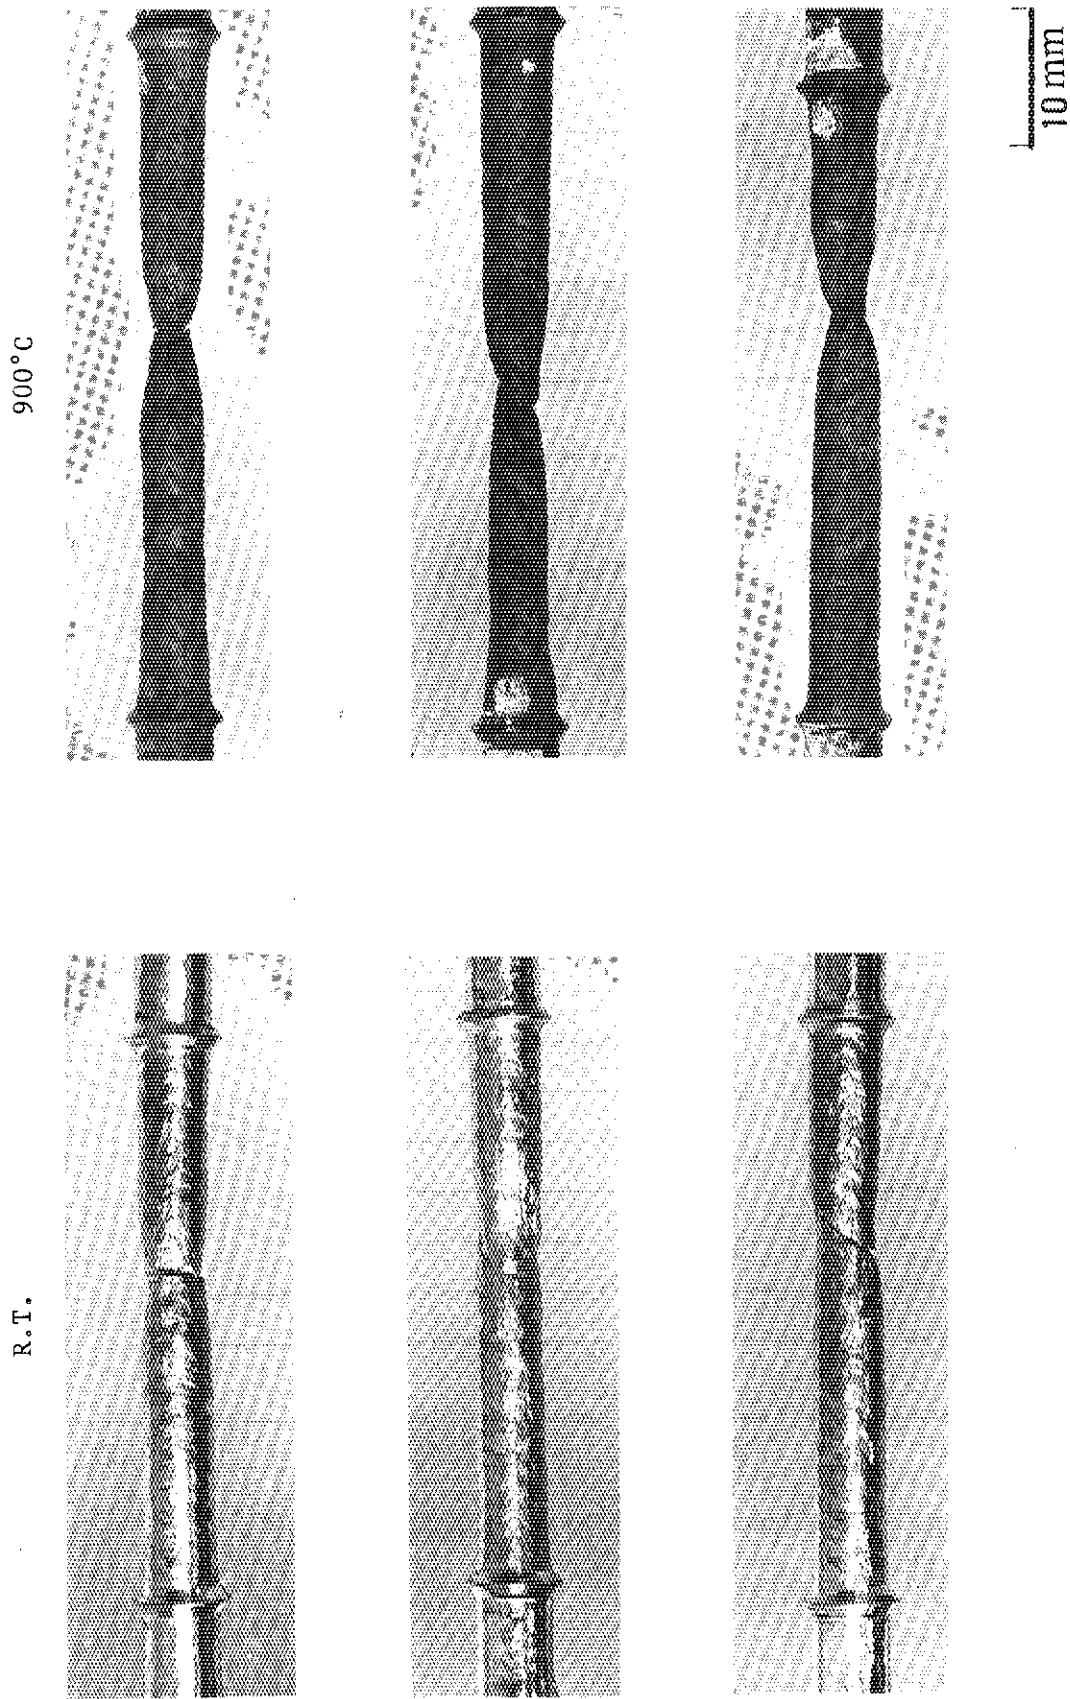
Tensile specimens of weld metals after testing at R.T. and 900°C
